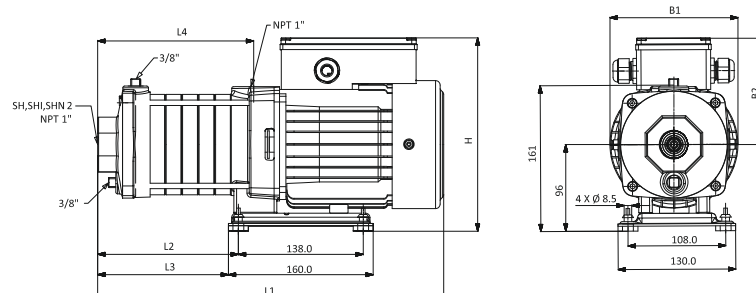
Dimensional sketches, SH,SHI,SHN-2 with SMG 71/80 motor
